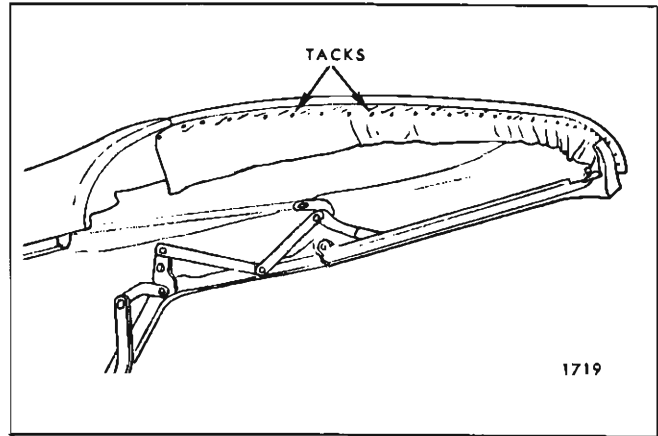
Installation of Top Material to Front Roof Rail
